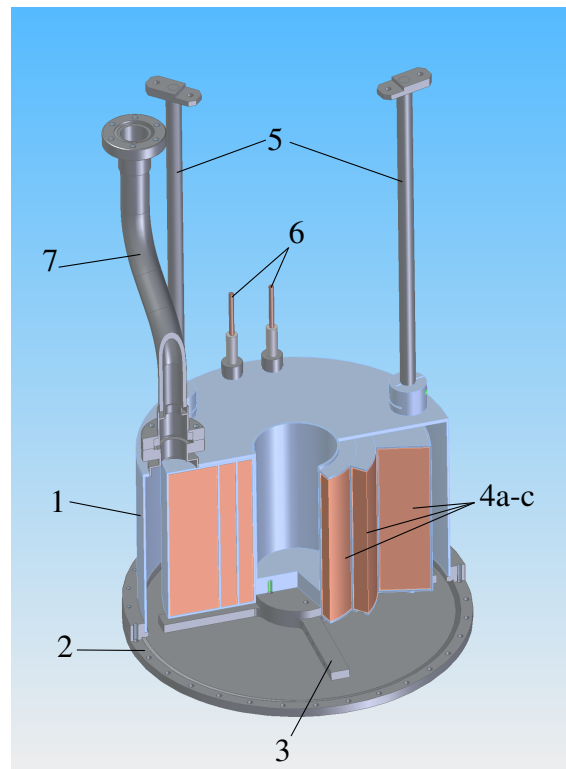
Cross-sectional CAD view on the components of the magnet, showing the outer vessel (1) and its main flange (2), a cross-shaped steel mount (3) for the bobbin where the three subcoils (4a-c) and their soldered joints are fixed (not shown), two of three steel legs (5) for mounting the whole assembly to the bottom of the helium cryostat, copper contacts for the current (6), and a flexible steel tube with flanges (7) to connect the coil vessel with the liquid helium tank.
